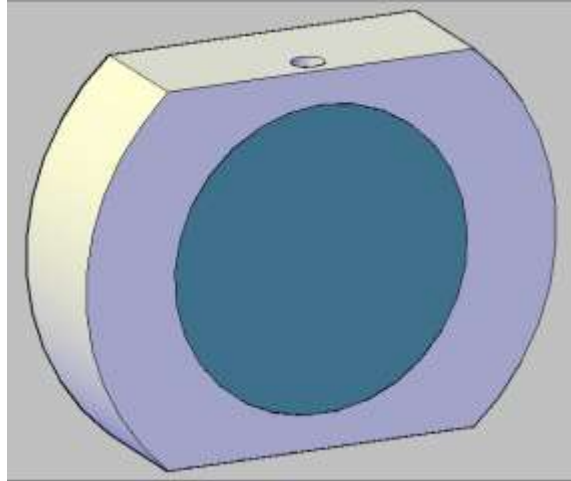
The side view of mold which is ready for injection of liquid polymer. Both disks are put into the external container
